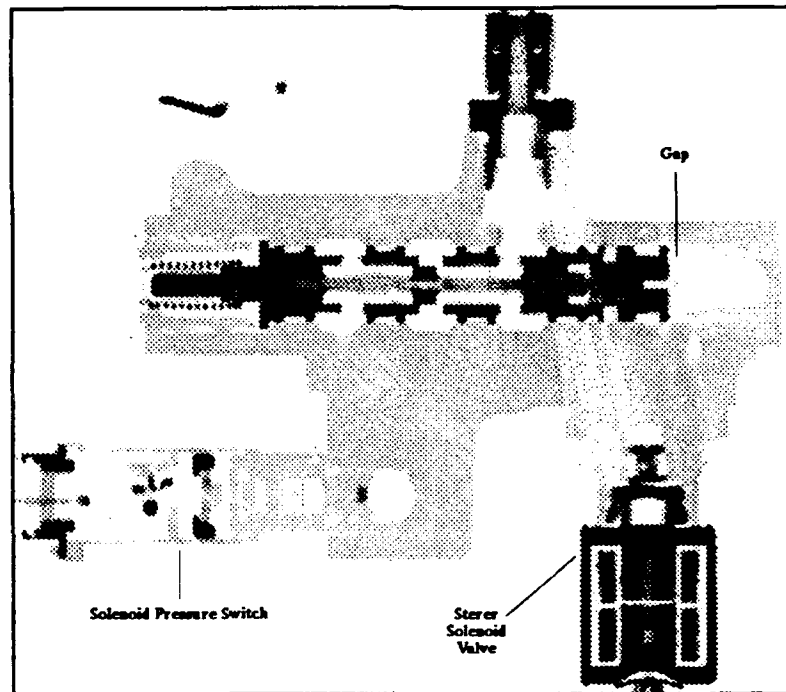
CT slice through the autobrake module at the height of the pressure control servovalve.
